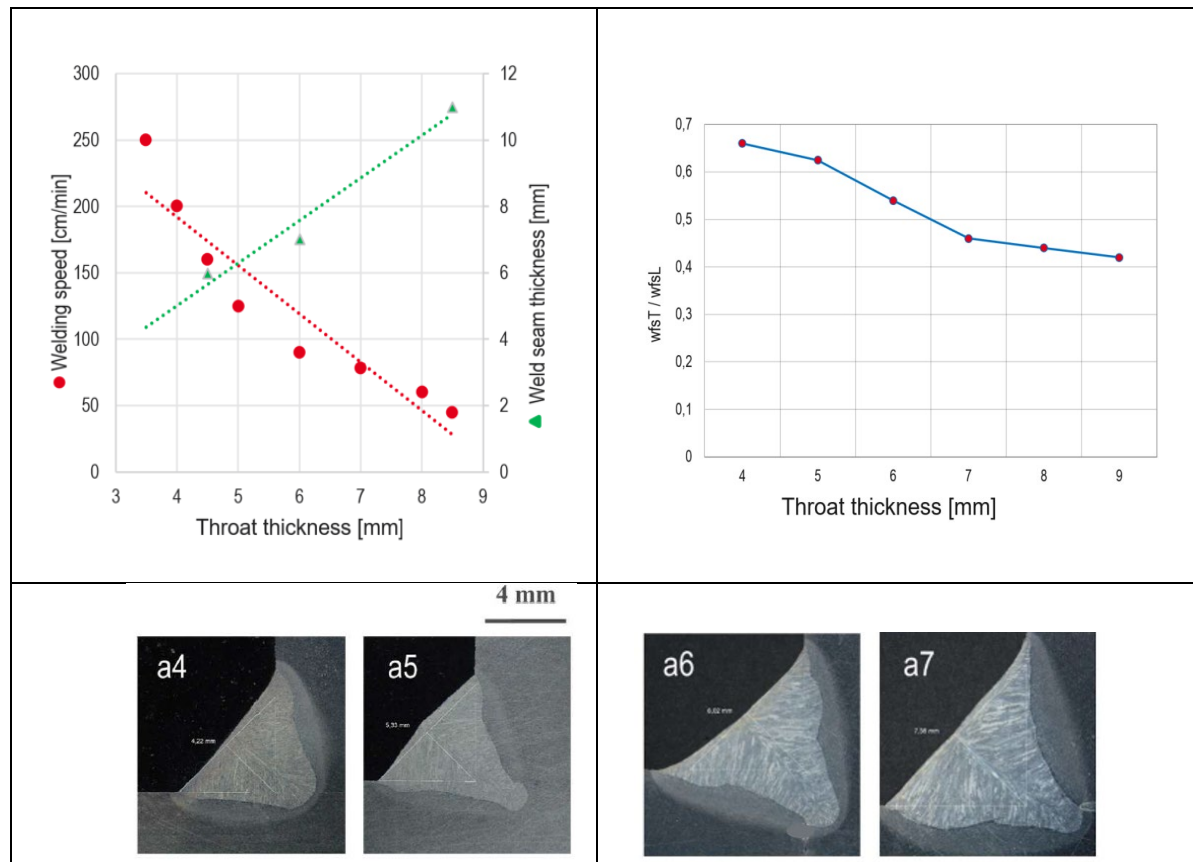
Maximum achievable welding speed for fillet welds welded in PA position with PMC/PMC. The wire feed speed spread is continuously decreased to maintain a deep penetration; material thickness: 8 – 15mm
